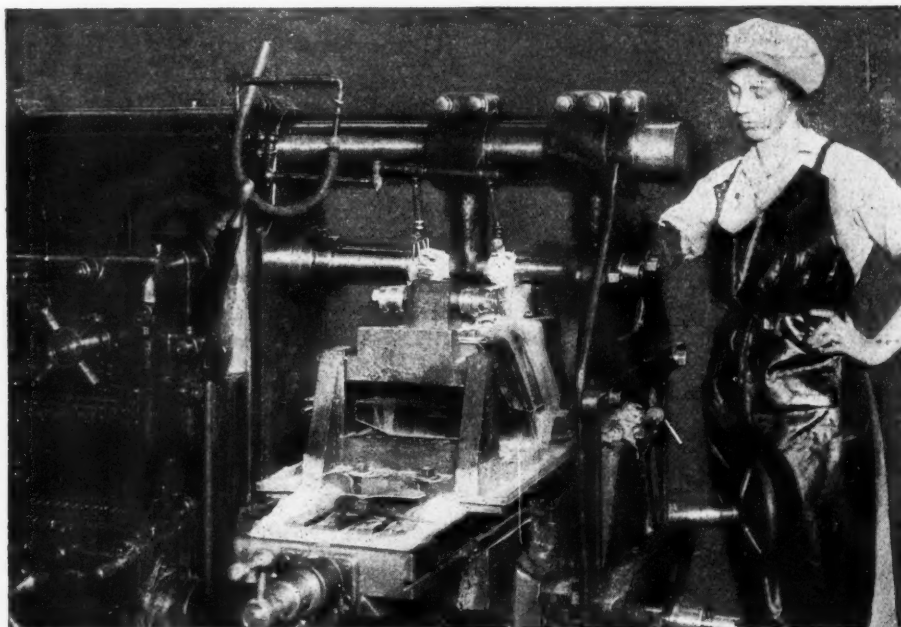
Milling sides of channel section on No. 2 Cincinnati miller with special fixture
